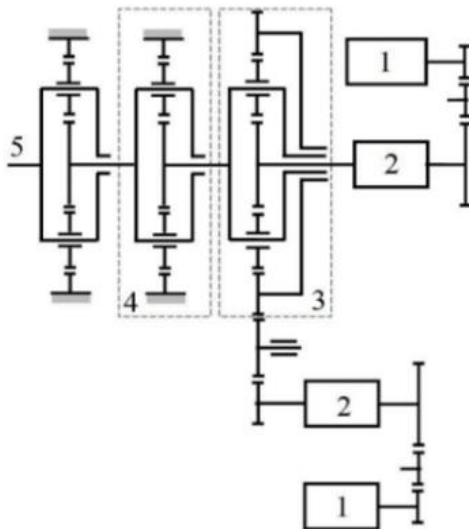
An example of drive of docking mechanism as a kinematic design: planetary unit-4,5; planetary gear-3; motors-1,2 (Golubev, 2019).
